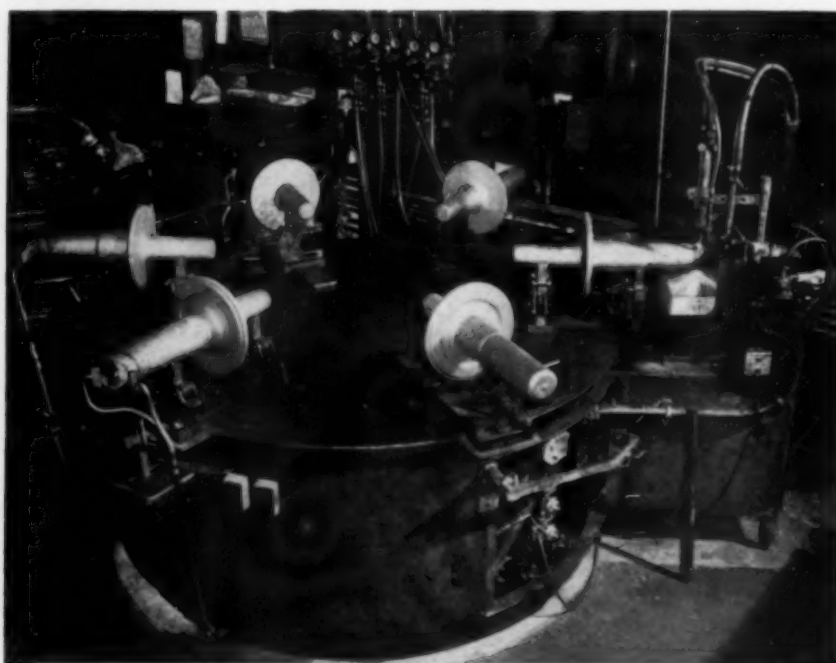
A Merry-Go-Round With Six Stations, Used for Preparing a Lug on End of a Forging, and Flame Hardening and Tempering the Lug Prior to Fracture Test
